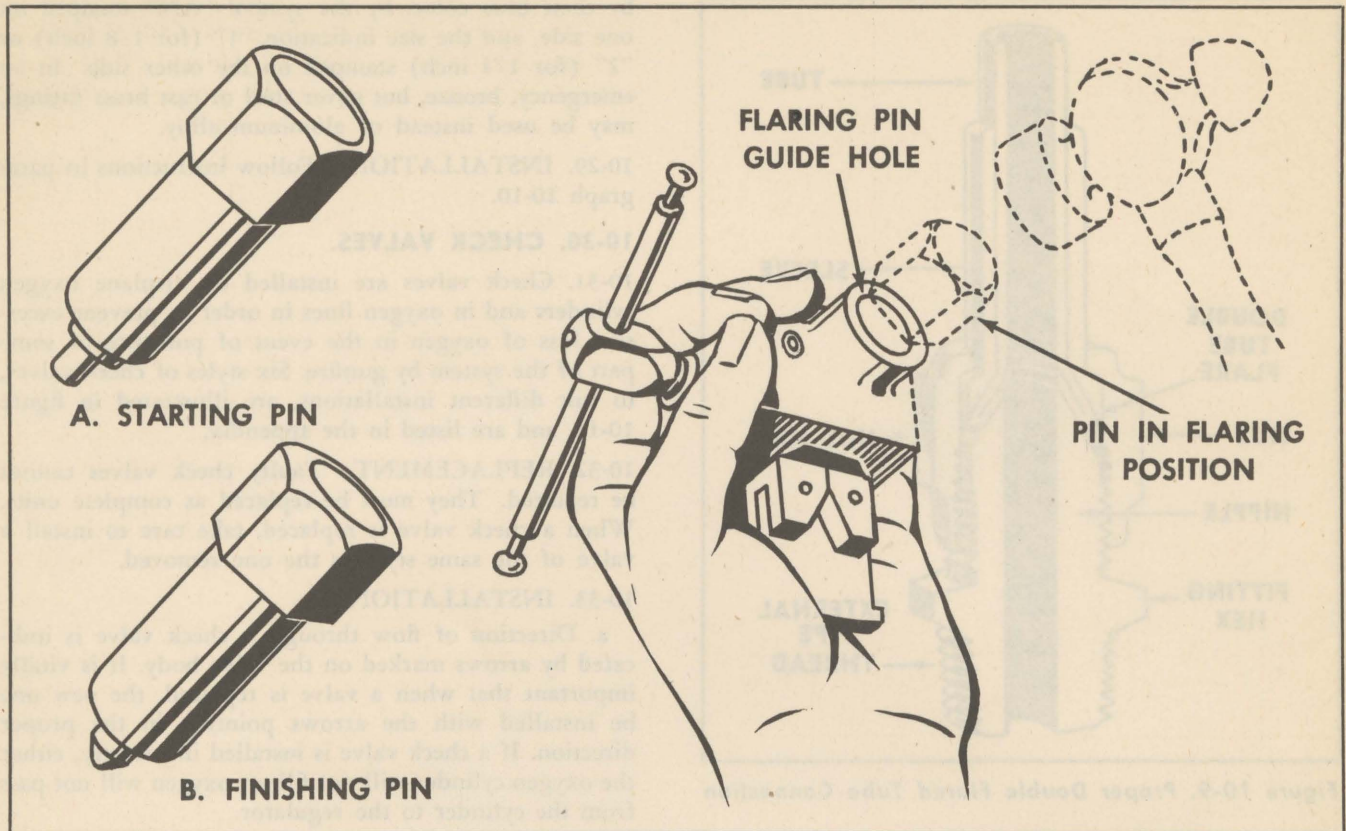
Flaring Tube with Double Flaring Tool Pins (A & B)
